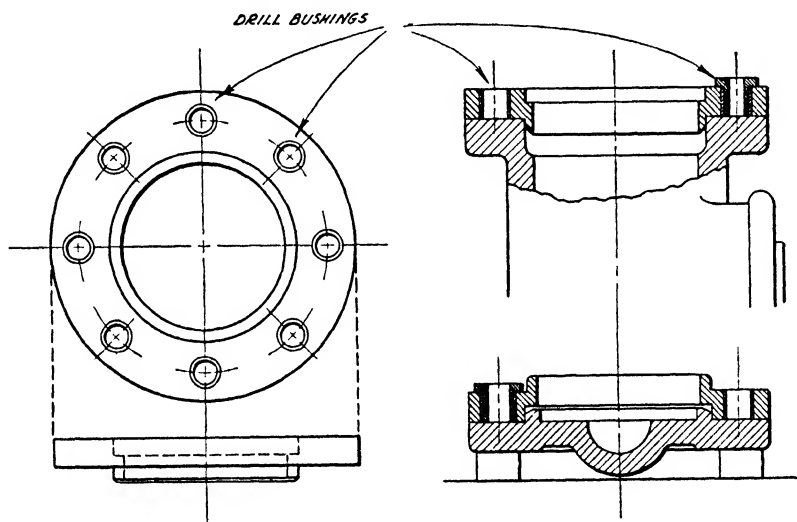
Open Drill Jig. Left: Jig. Right: Jig in use.
